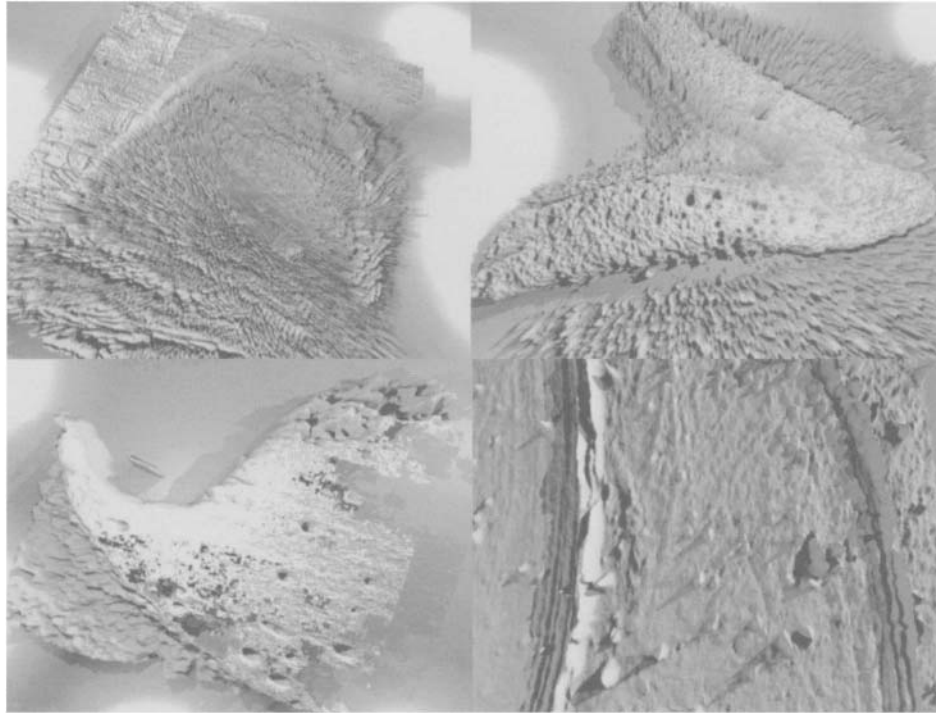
3D surface morphology, (left top): weld made by tungsten inert gas, (right top): melted zone, thermally affected zone and sensitized zone, (left bottom): melted hemisphere with furrow during welding, (right bottom): weld made point by point using a laser beam.
